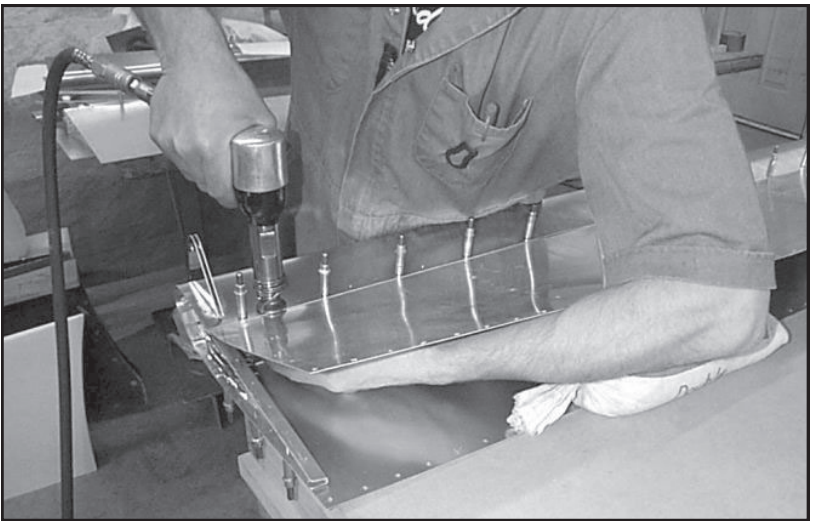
Riveting the aft bottom skin and nose skin to the spar.
